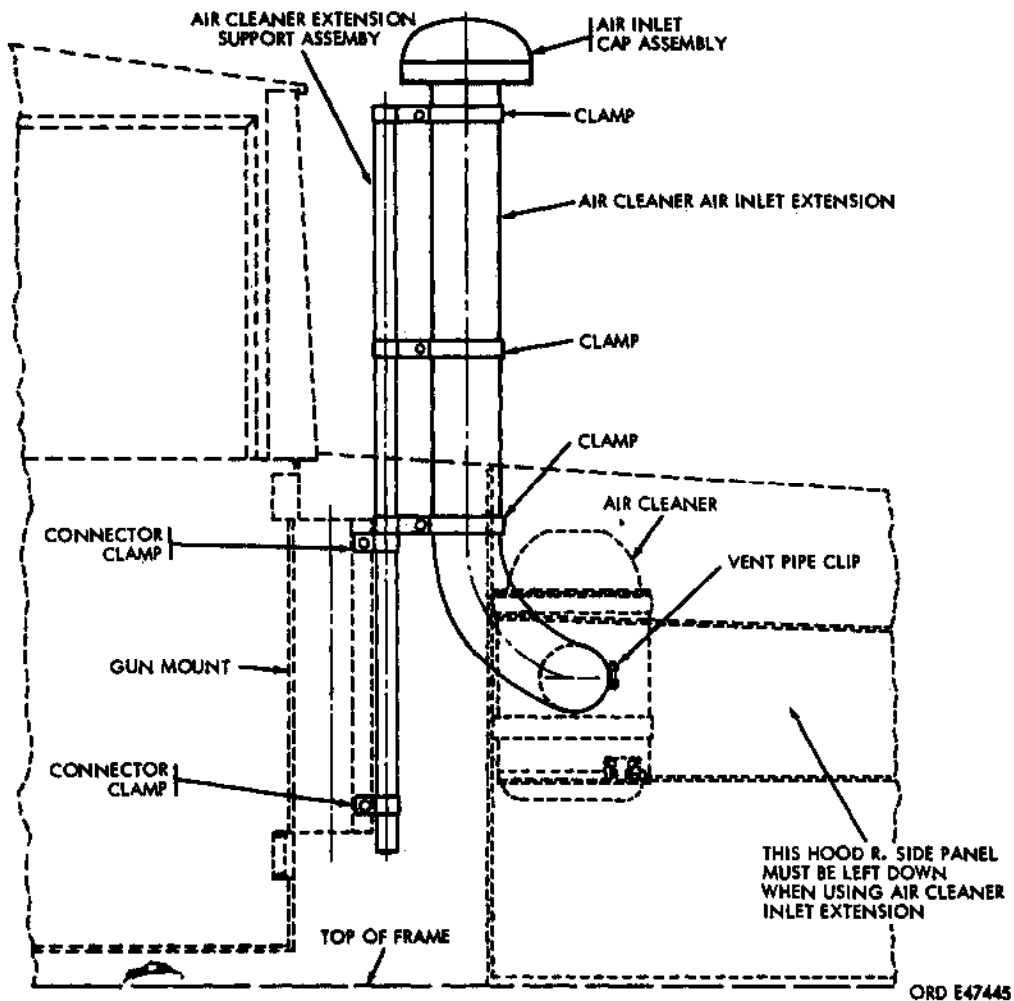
Air cleaner air inlet extension installed - gasoline engine wheeled vehicle
